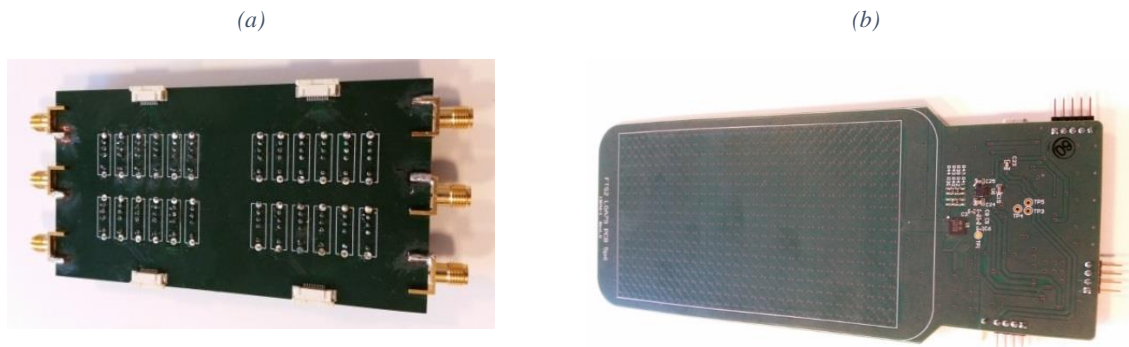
Electronic boards developed to control the thin-film touchpad (a) Interface PCB, include the flex connectors and SMA connector for external test purposes. (b) STMicroelectronics FTS1 capacitive touchscreen demonstrator used as a control board in this application.
